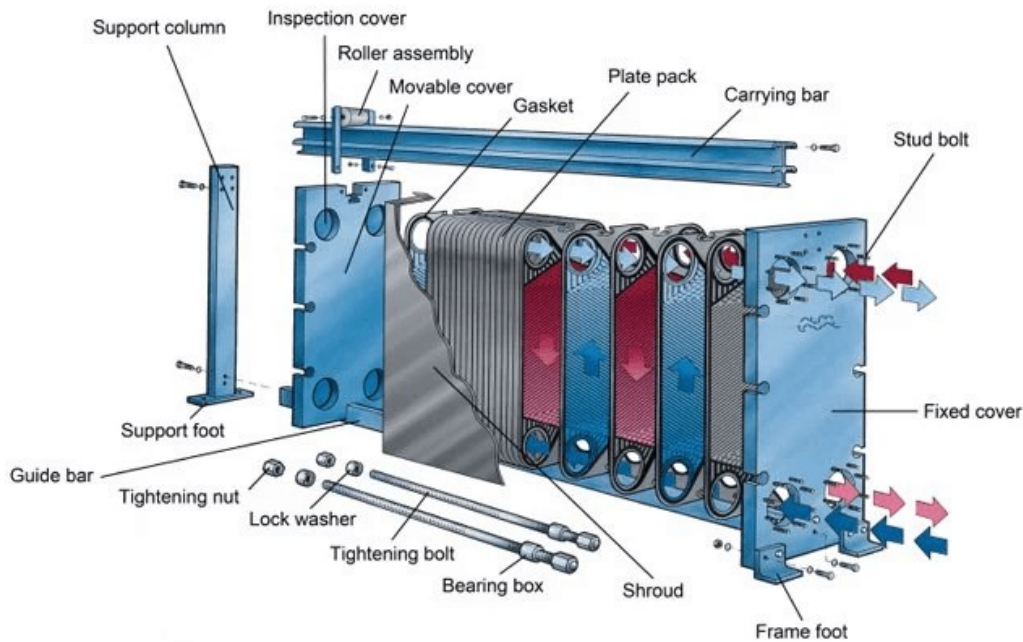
Gasket Plate Heat Exchanger Exploded View and Working Principle (Figure from Alfa Laval Used with Permission)
